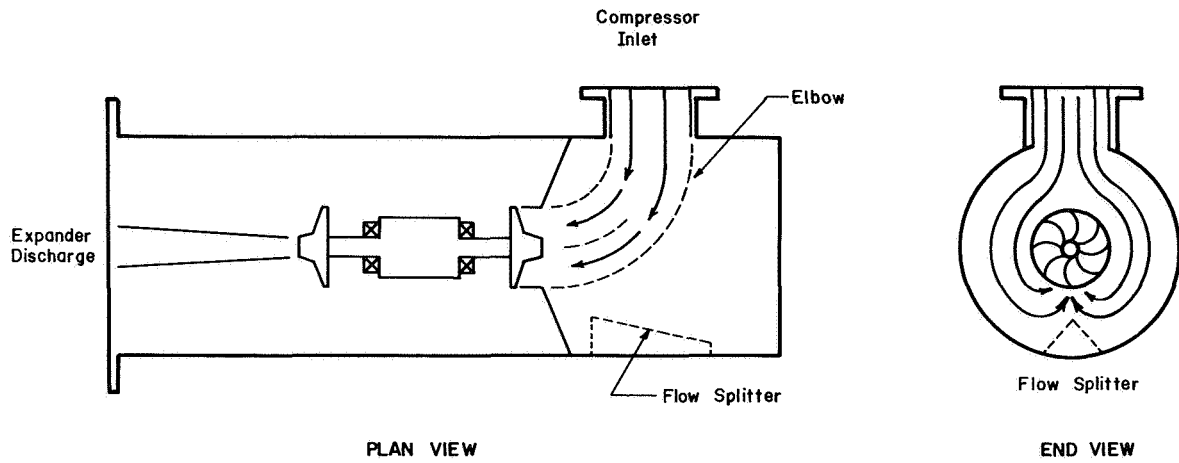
Cutaway drawing of turboexpander/compressor, illustrating inlet modifications.
